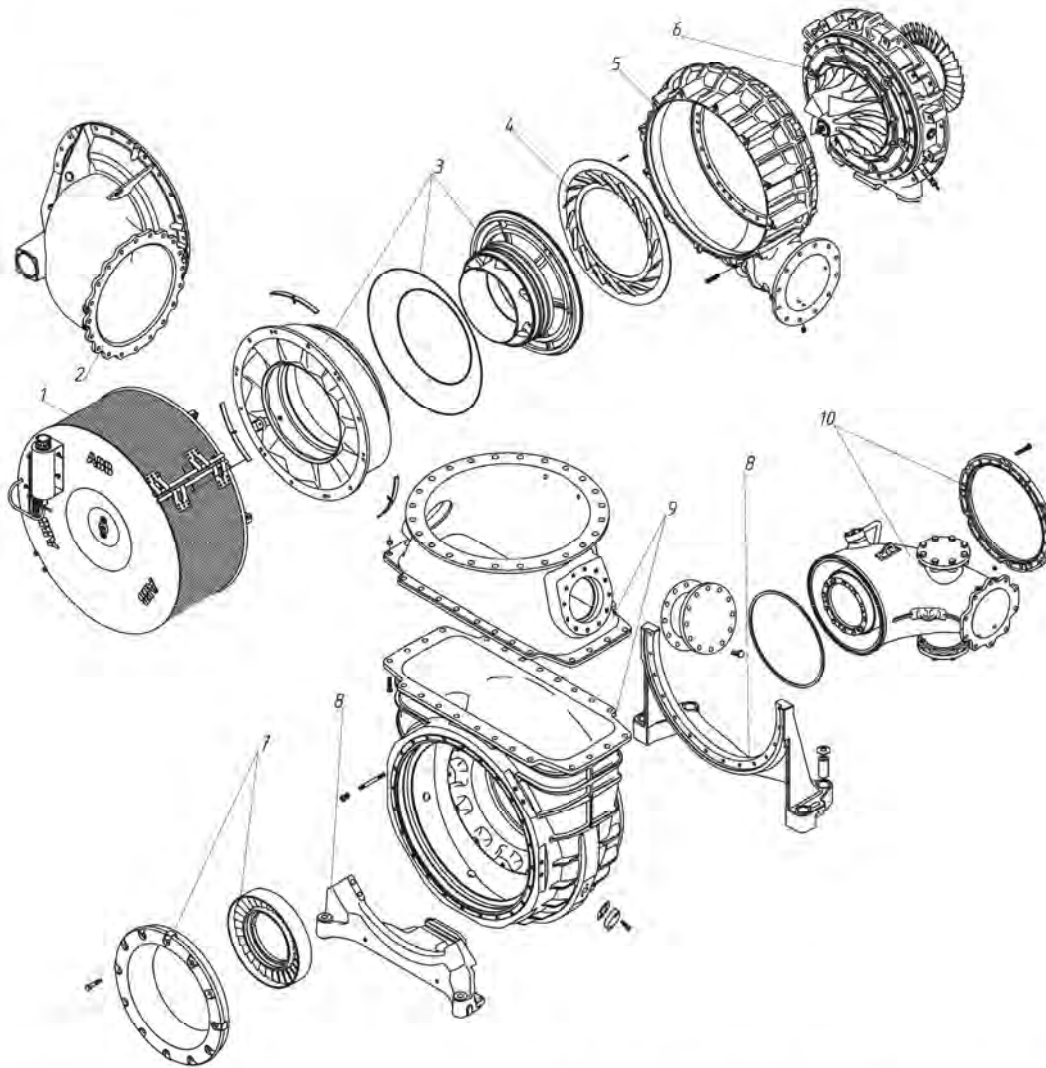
Housing parts of a turbocharger type TPL76-C from ABB: 1 – air supply pipe; 2 – air filter; 3 – details of the sealing disc; 4 – compressor diffuser; 5 – air exhaust spiral chamber (volute); 6 – middle housing with bearings and rotor; 7 – details of the turbine inlet guide vane; 8 – turbocharger mounting supports; 9 – gas turbine housing with gas outlet pipe; 10 – details of the gas supply channel (adapted from [44])
